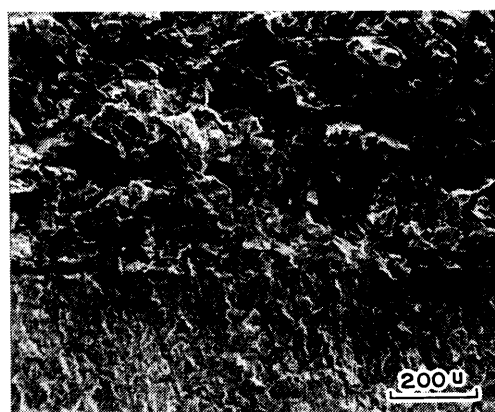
Macroscopic fractured surface in machine-notched specimen for testing temperatures and bending rates ($\rho=0.5$ mm).
